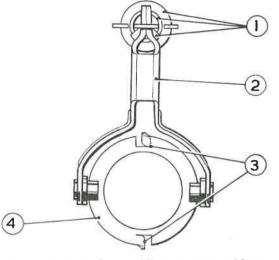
Method of assembling engagement lever and solenoid plunger (refer 'NOTE')
